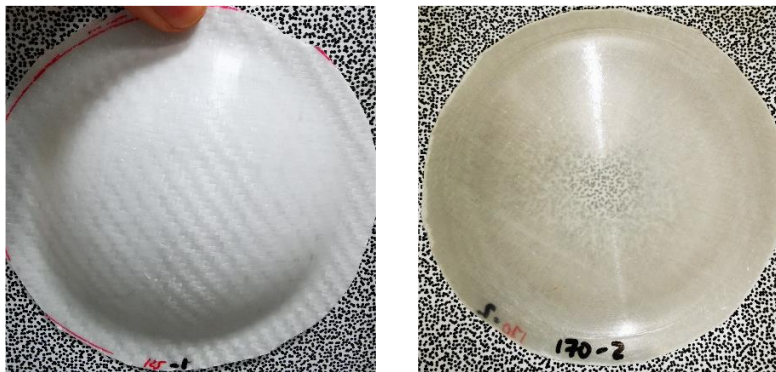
Manufactured parts via hot press consolidation at 125°C (Left) and 170°C (Right)
